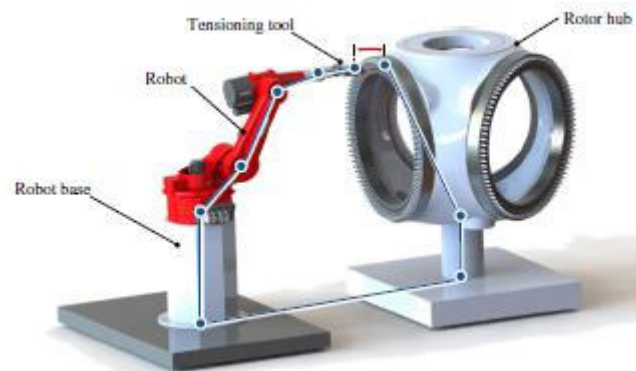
Rotor hub, bearing bolt tightening robot (Müller et al., 2014)
